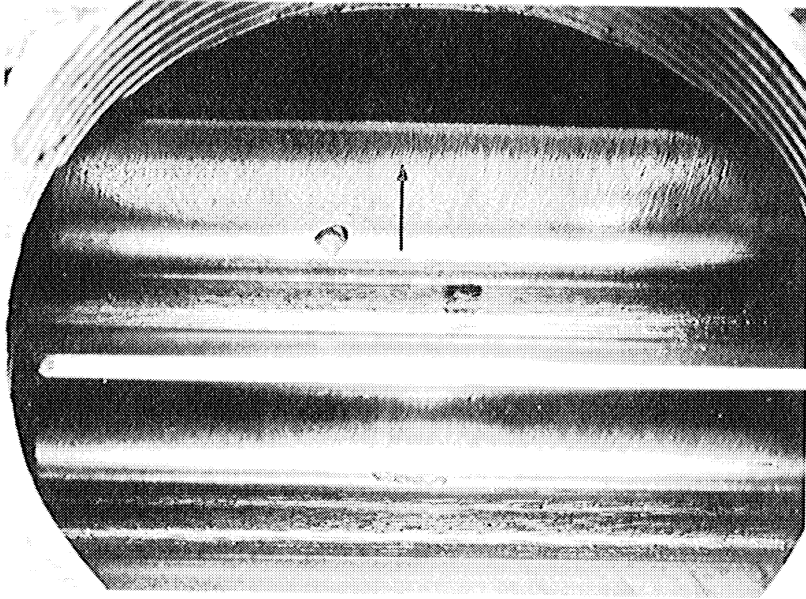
Heavy drive pinion seen through hole in housing showing arrowhead pit pointing to root (arrow indicated direction of rolling).
